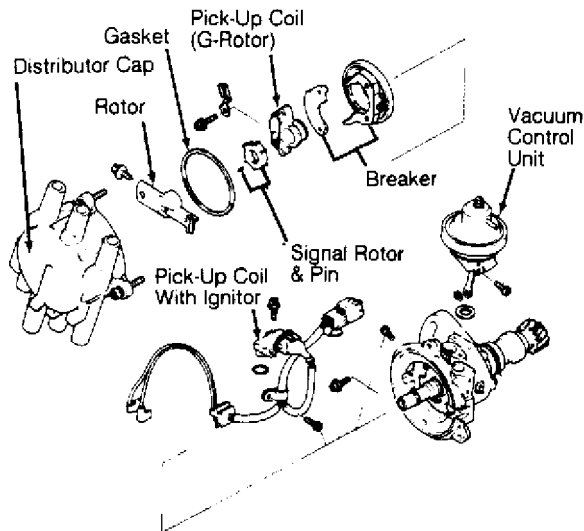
Exploded View Of Distributor (B2200 Carbureted)
